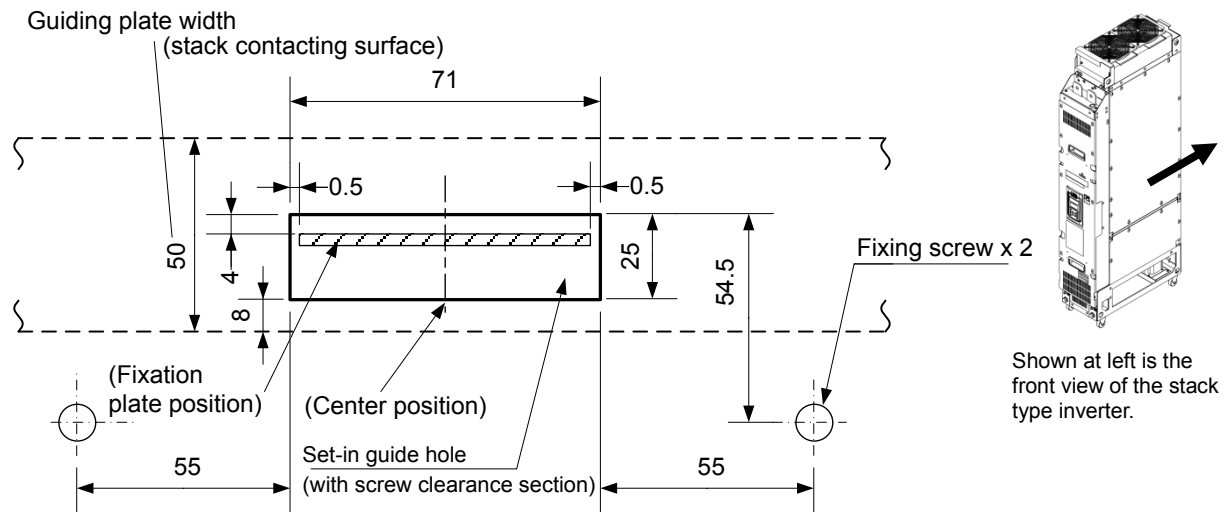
Set-in guide hole for the back face upper fixation plate
